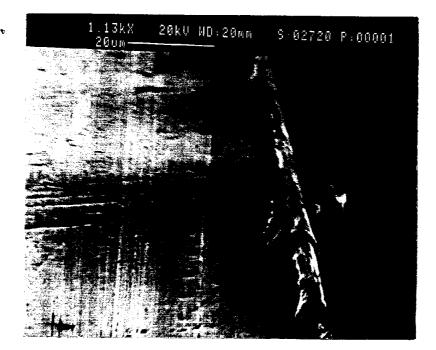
Example of material fold over onto land for S/N 2720 primary (trimmed but no wipe).
